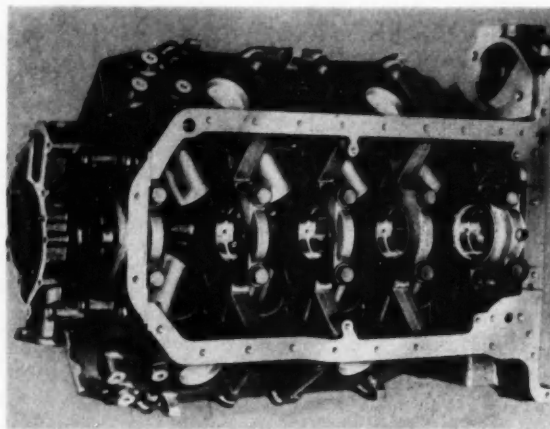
The crankcase flange extends far enough below the centerline of the crankshaft to permit use of a flat, one-piece oilpan gasket
